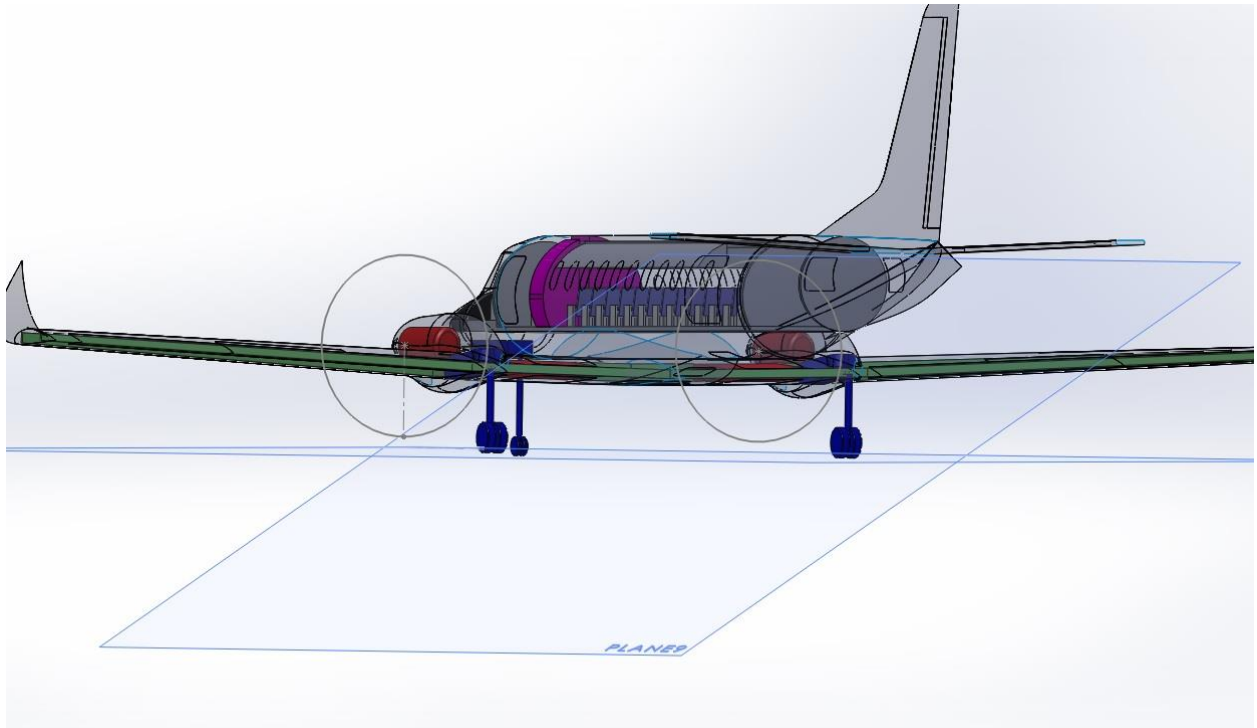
Side view depicting gear, engines, seats, lavatory, galley, closet, avionics, spars, wing tanks, and landing gear bays
